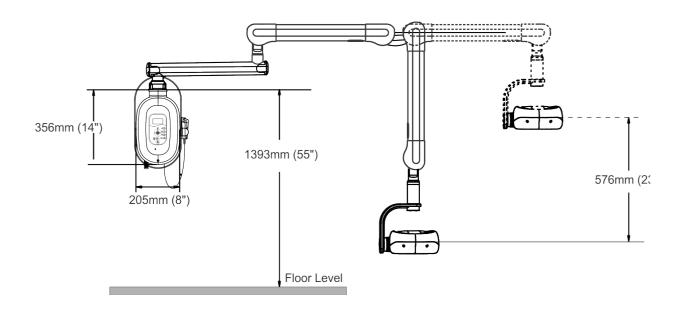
Wall Mounted ImageScan HD Ground Clearance & Horizontally Extended
